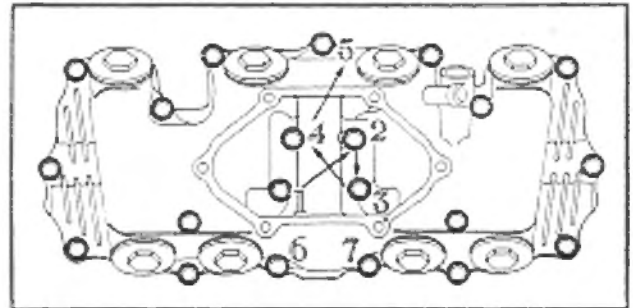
Tightening sequence of cylinder head cover bolts
